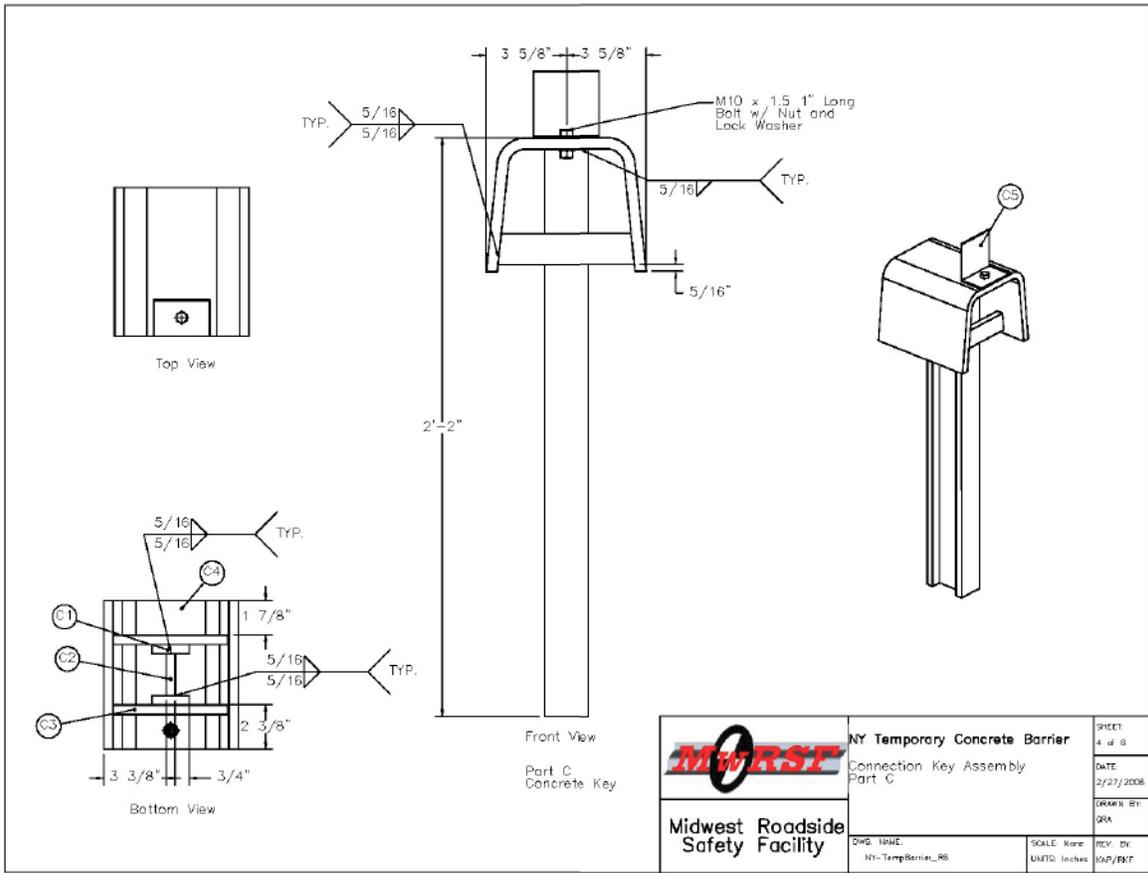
Connection Key Assembly Details (English), Test NYTCB-2
